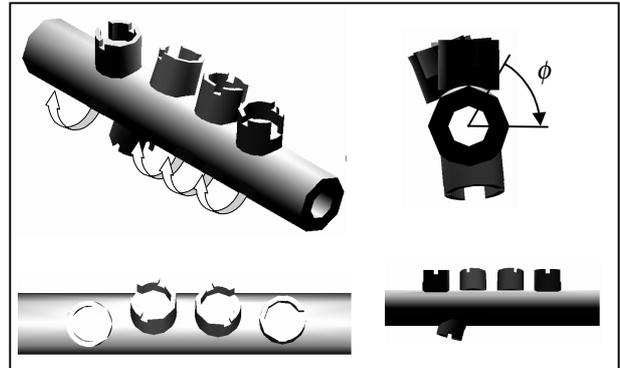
The scheme shows a typical assembly of the grasping handle using the sensor holder rings and the separator rings properly arranged on the hollow cylinder.
